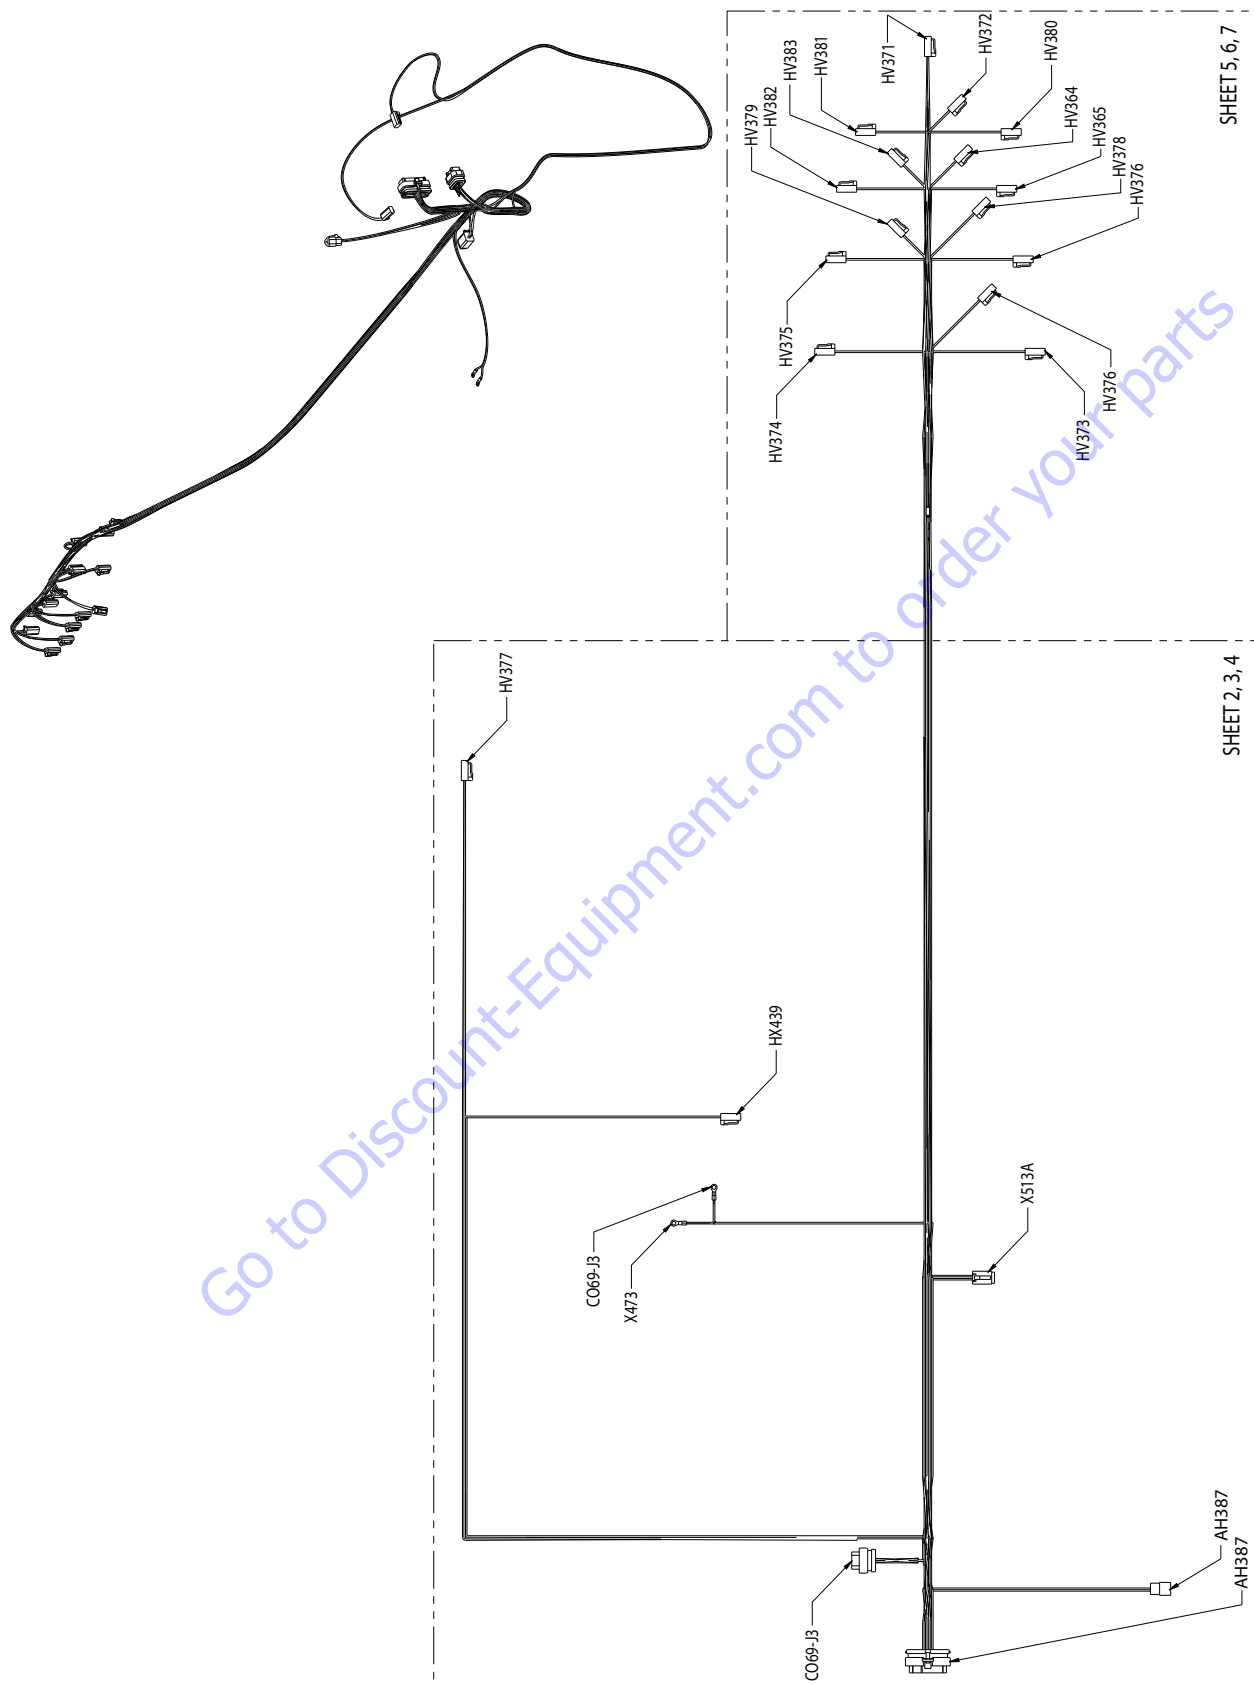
Turntable Harness - Sheet 13 of 14
